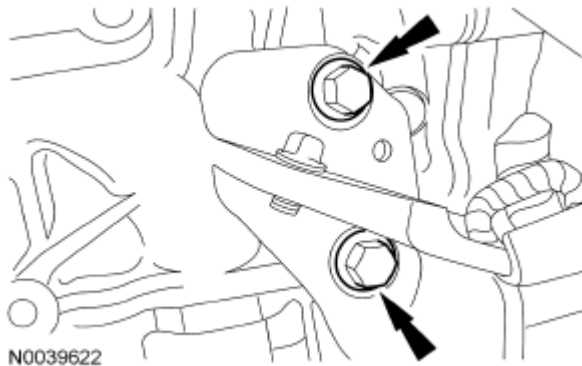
Locating RH Halfshaft Carrier Bearing Bracket Bolts
